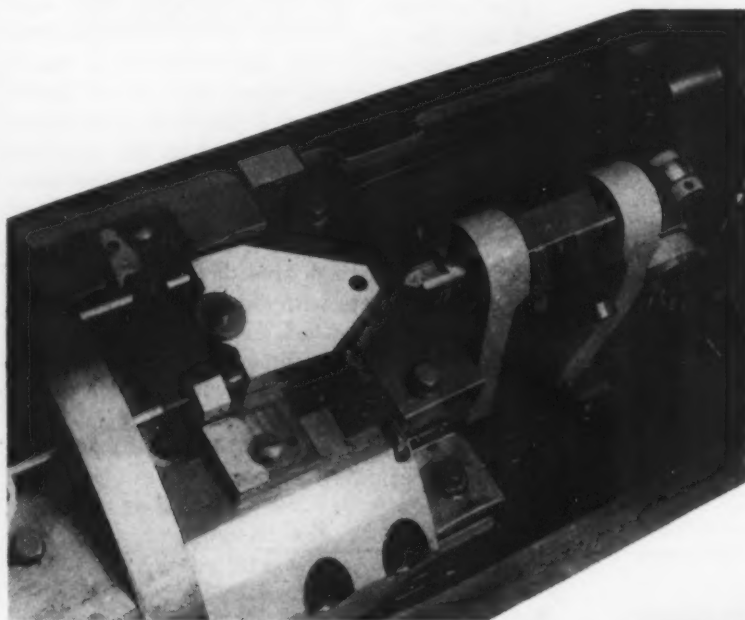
The wheel trueing cam is adjustable. It is held friction tight by screws and keyways align it. By a screw adjustment, movement of the cam is transmitted to a 0.0001 in. reading indicator. A spring eliminates backlash.
